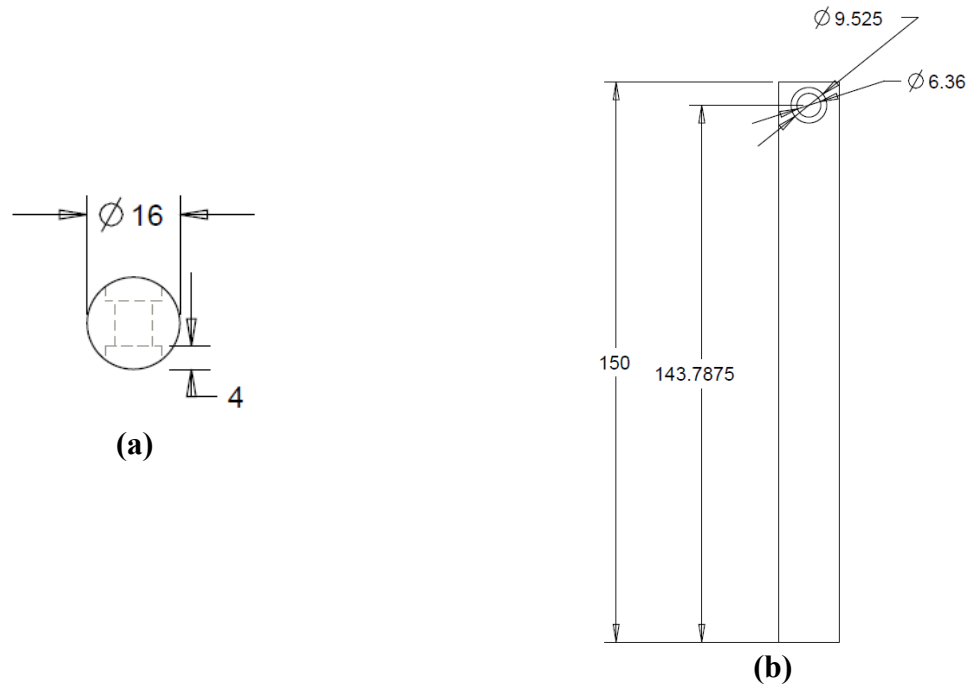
Tower drawing, measurements recorded in [mm]. (a) Top view (b) Front view
